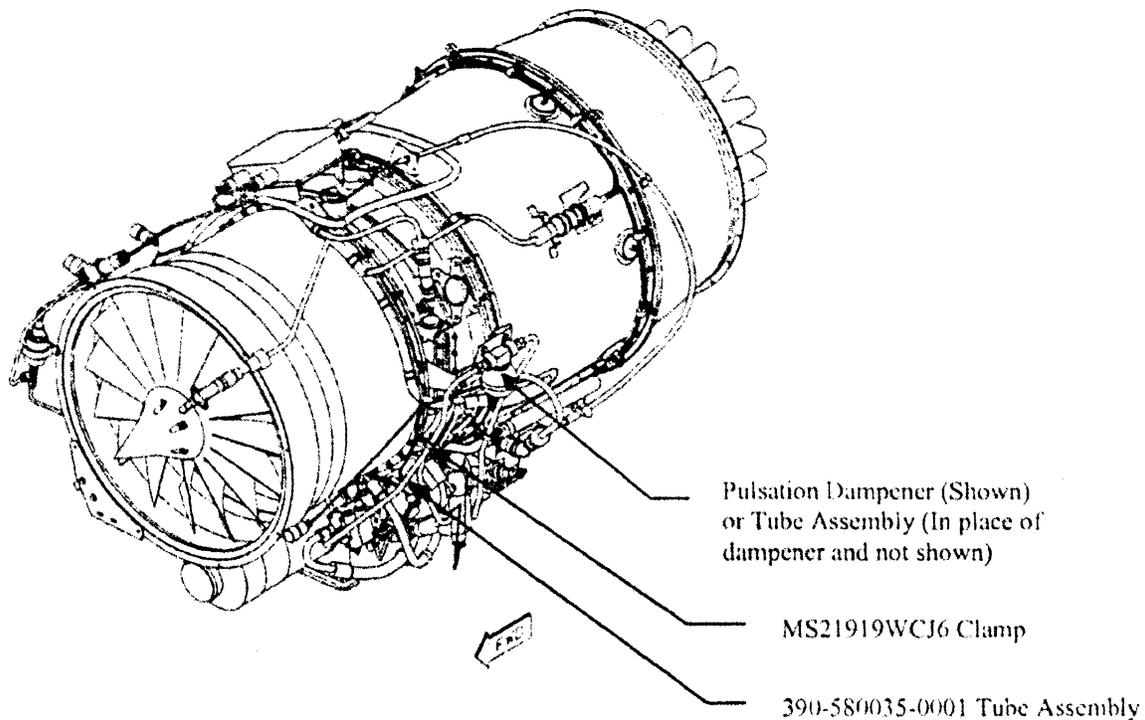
Hydraulic Tube Assembly with Clamp on Left Hand Engine.
